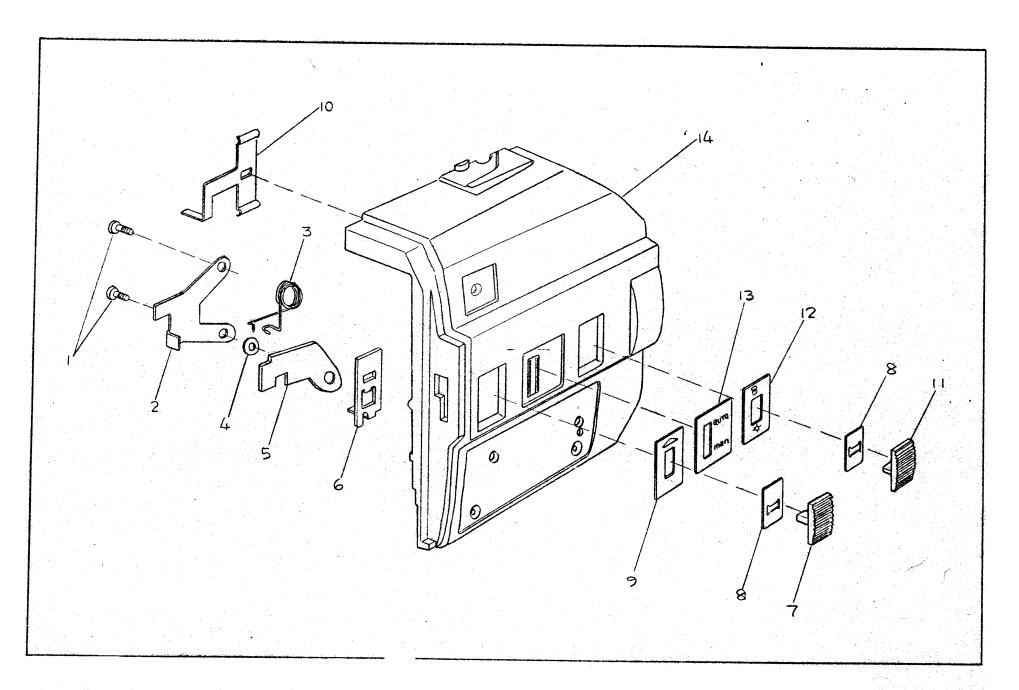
Right Side Housing Assembly - CARTER DROIT -
